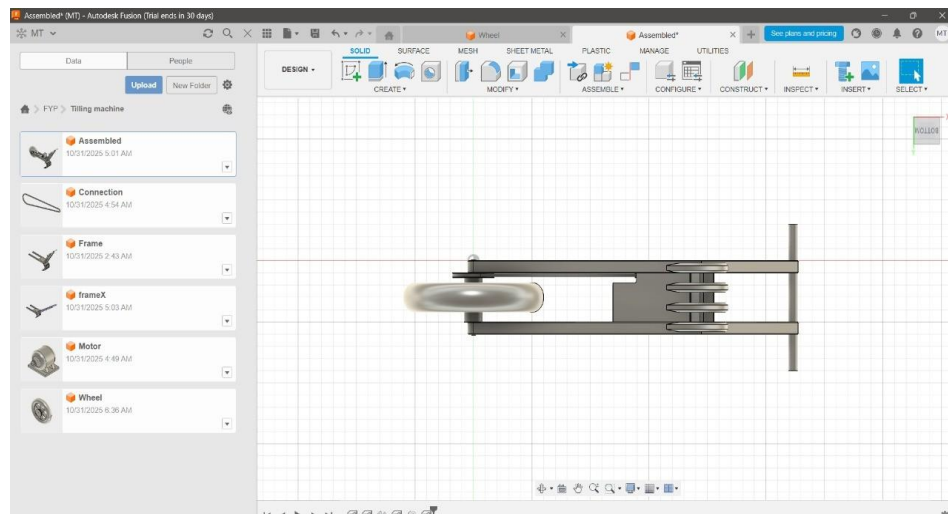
Top view of the machine illustrating component alignment and blade spacing.
